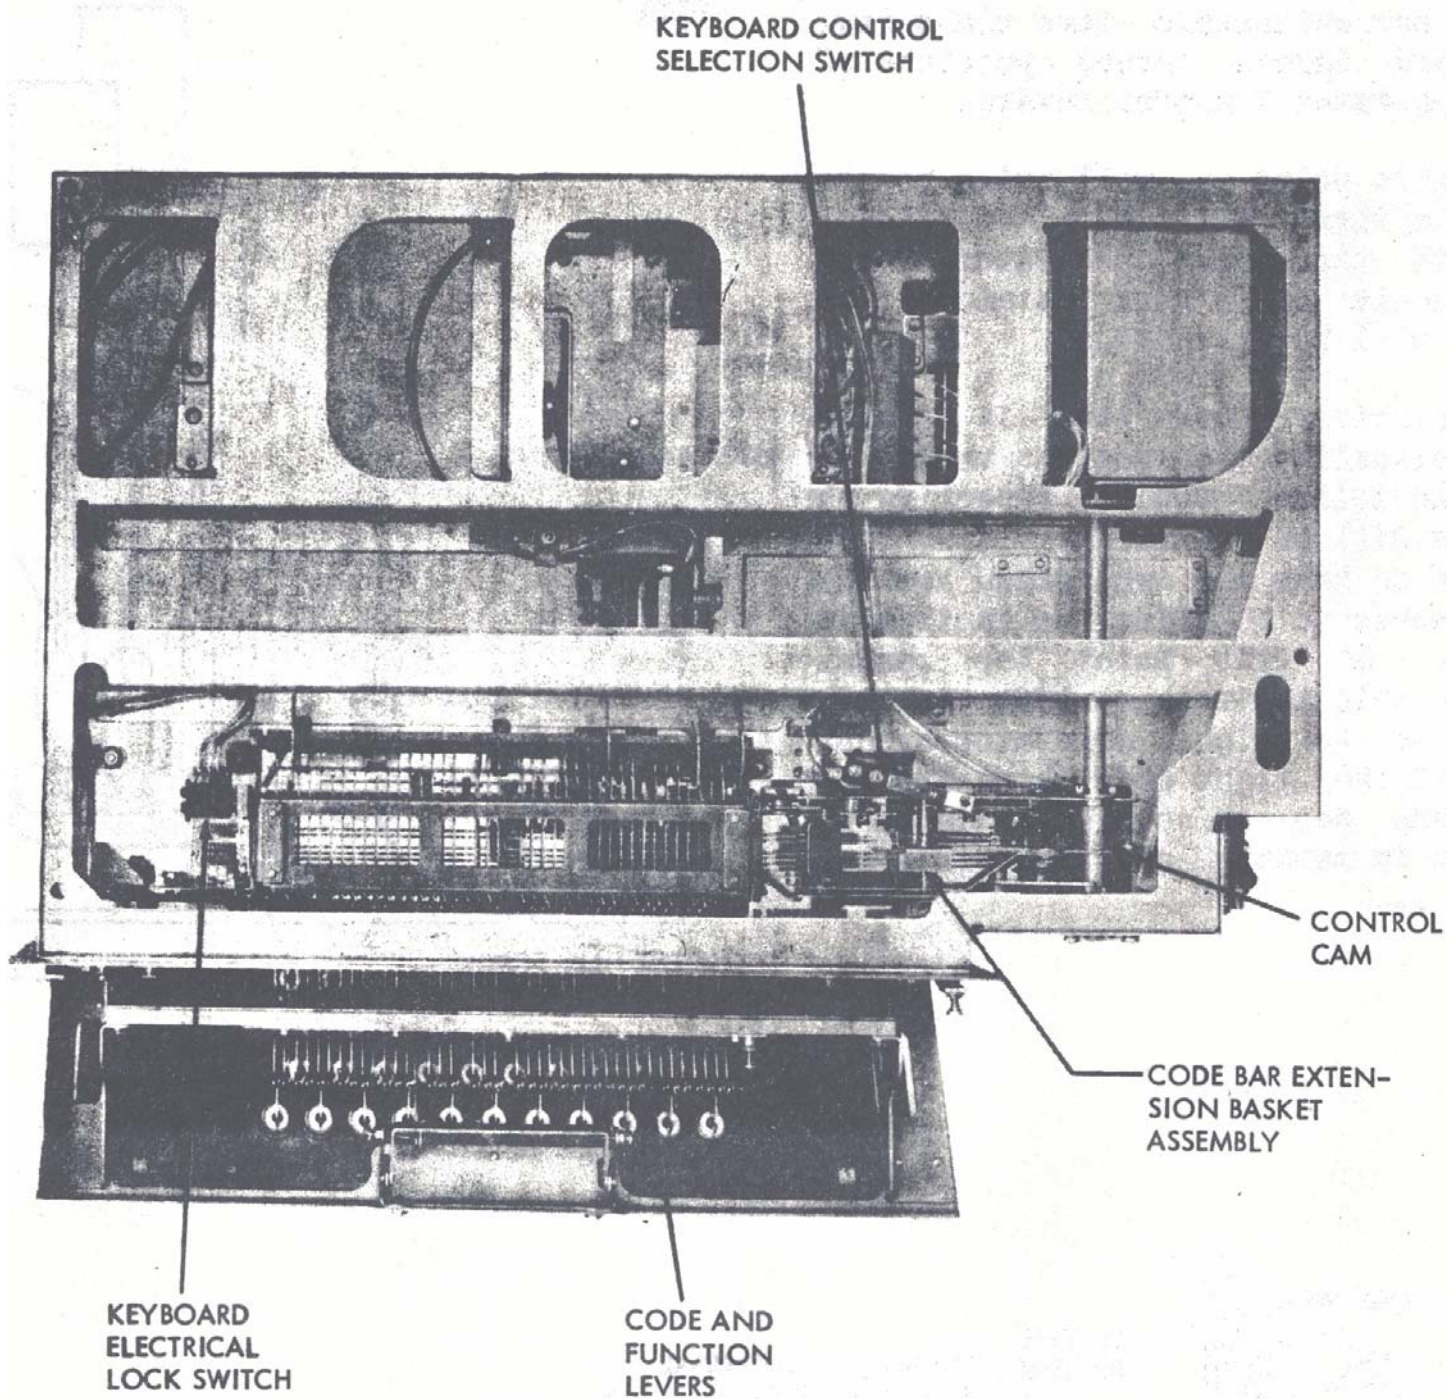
MODEL 28 PERFORATOR TRANSMITTER BASE, BOTTOM VIEW
